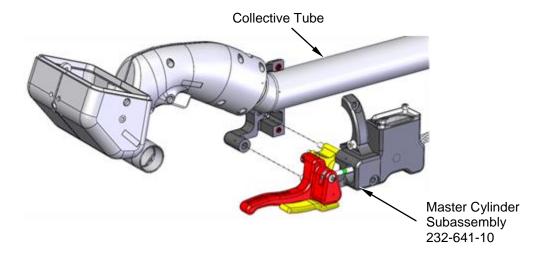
Installing the Port Master Cylinder Assembly – Single Hook
